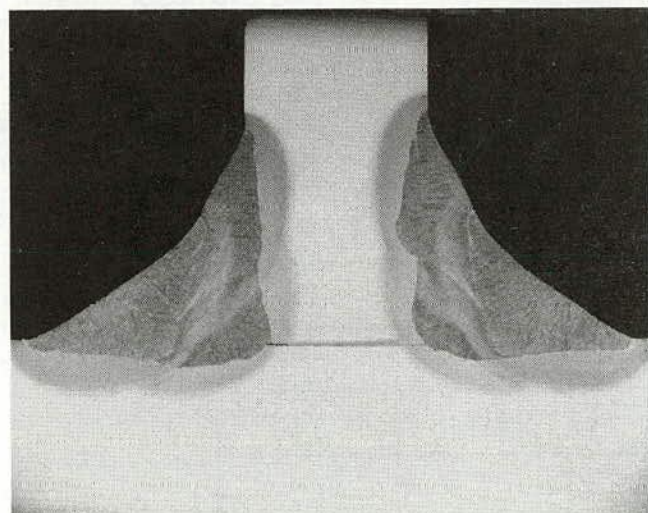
Macrosection of fillet weld soundness test for weld W84, underwater oxygen plasma-cut edge on Grade 50W plate, 12.7 mm ($1/2$ in.) thick, welded by FCAW. Original mag. $\times 2.5$; as shown $\times 1.75$.
